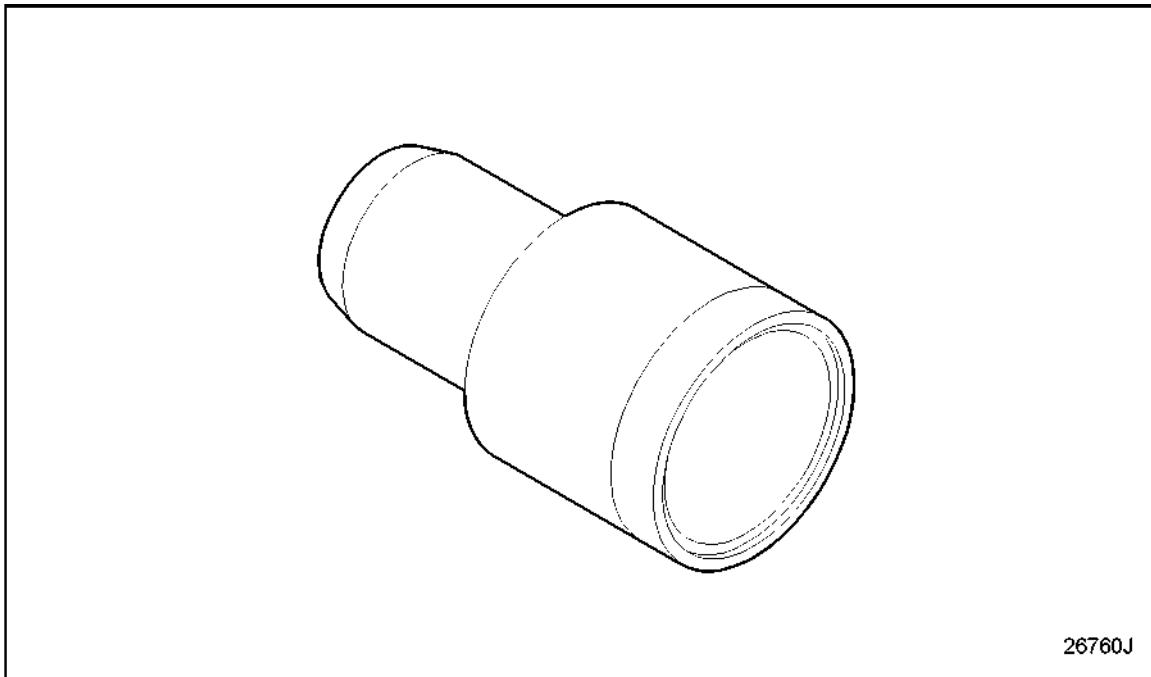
Front Seal Installer (STD) 8V-53,J 22153
